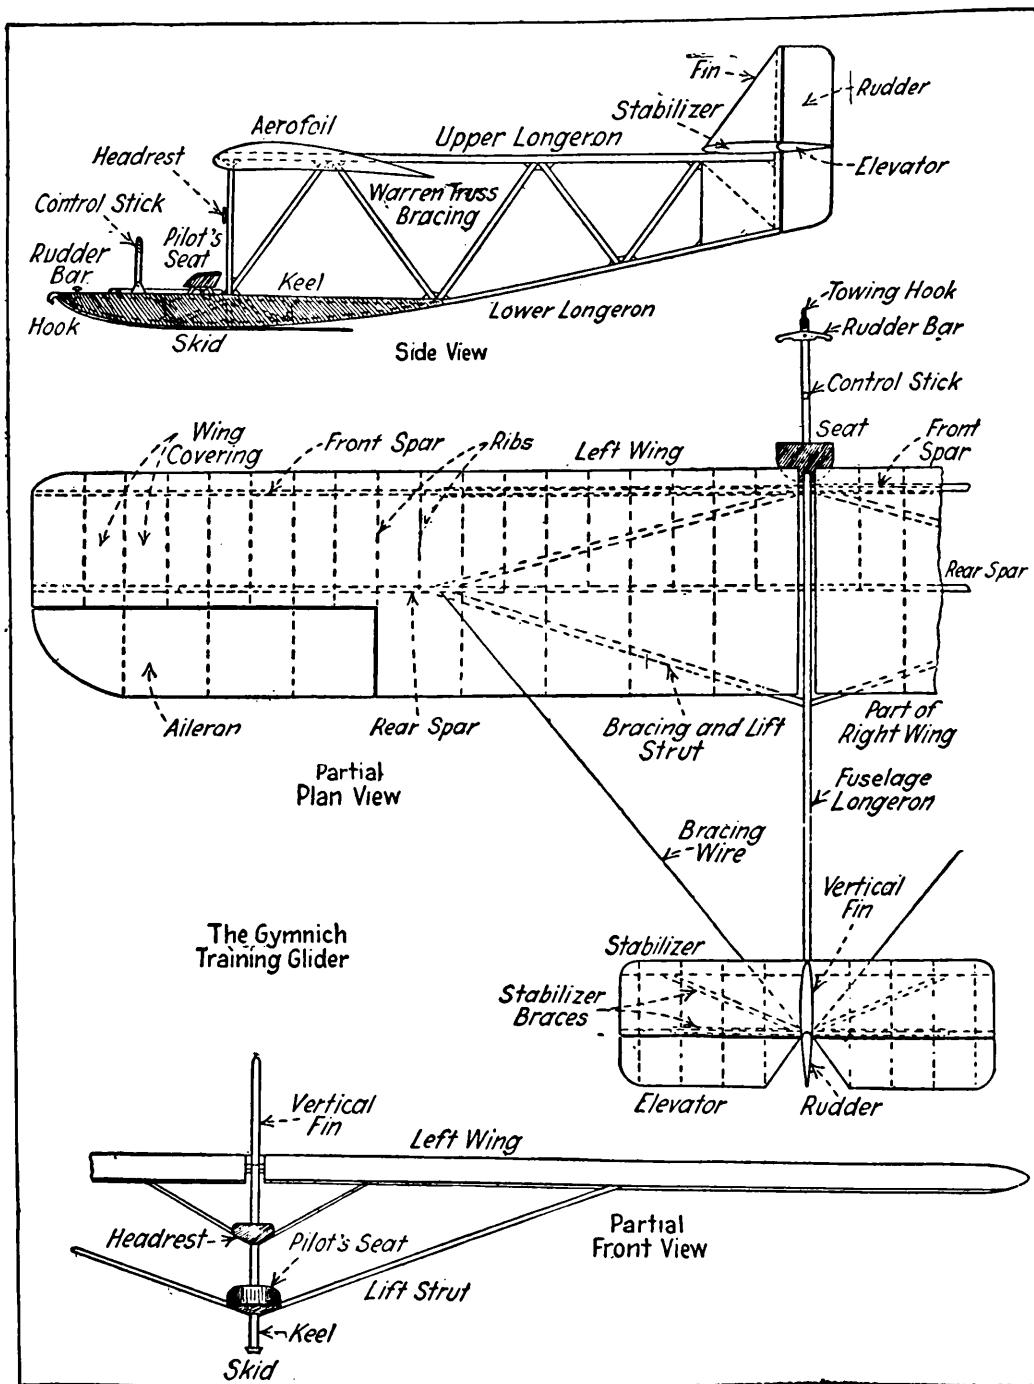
Outline Drawings Showing Full Side and Partial Plan and Front Views of Typical Training Type Glider, Depicting Important and Principal Parts and Their Relation to Each Other.
